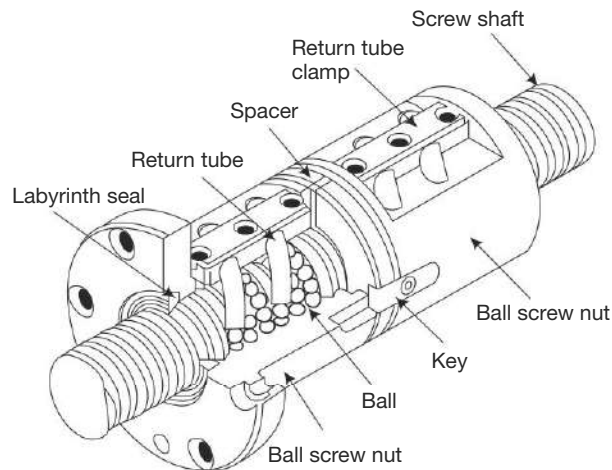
A recirculating ball screw and nut arrangement with external return tube (Courtesy, THK Co. Ltd., Japan)
